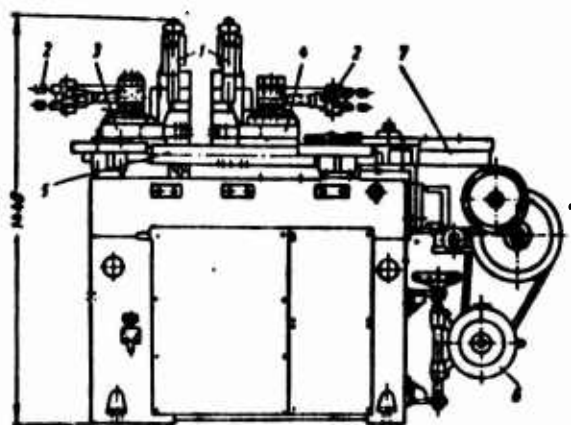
Automatic joint machine of type MSM-150: 1 — pneumatic clamps; 2 — regulated rests; 3 — motionless plate; 4 — mobile plate; 5 — directrices; 6 — motor of drive; 7 — box with cam of upsetting.
